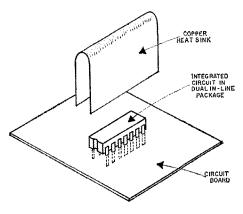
Heat sink for integrated circuits that come in dual in-line packages.
